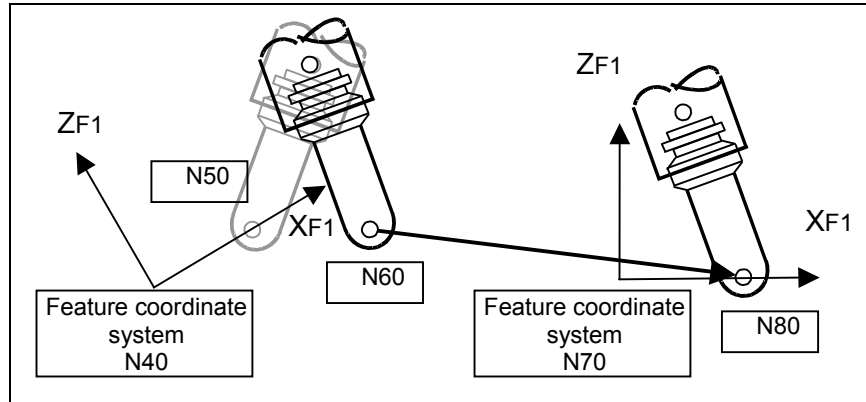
(d) Example of operation 3 (tool rotation type)
